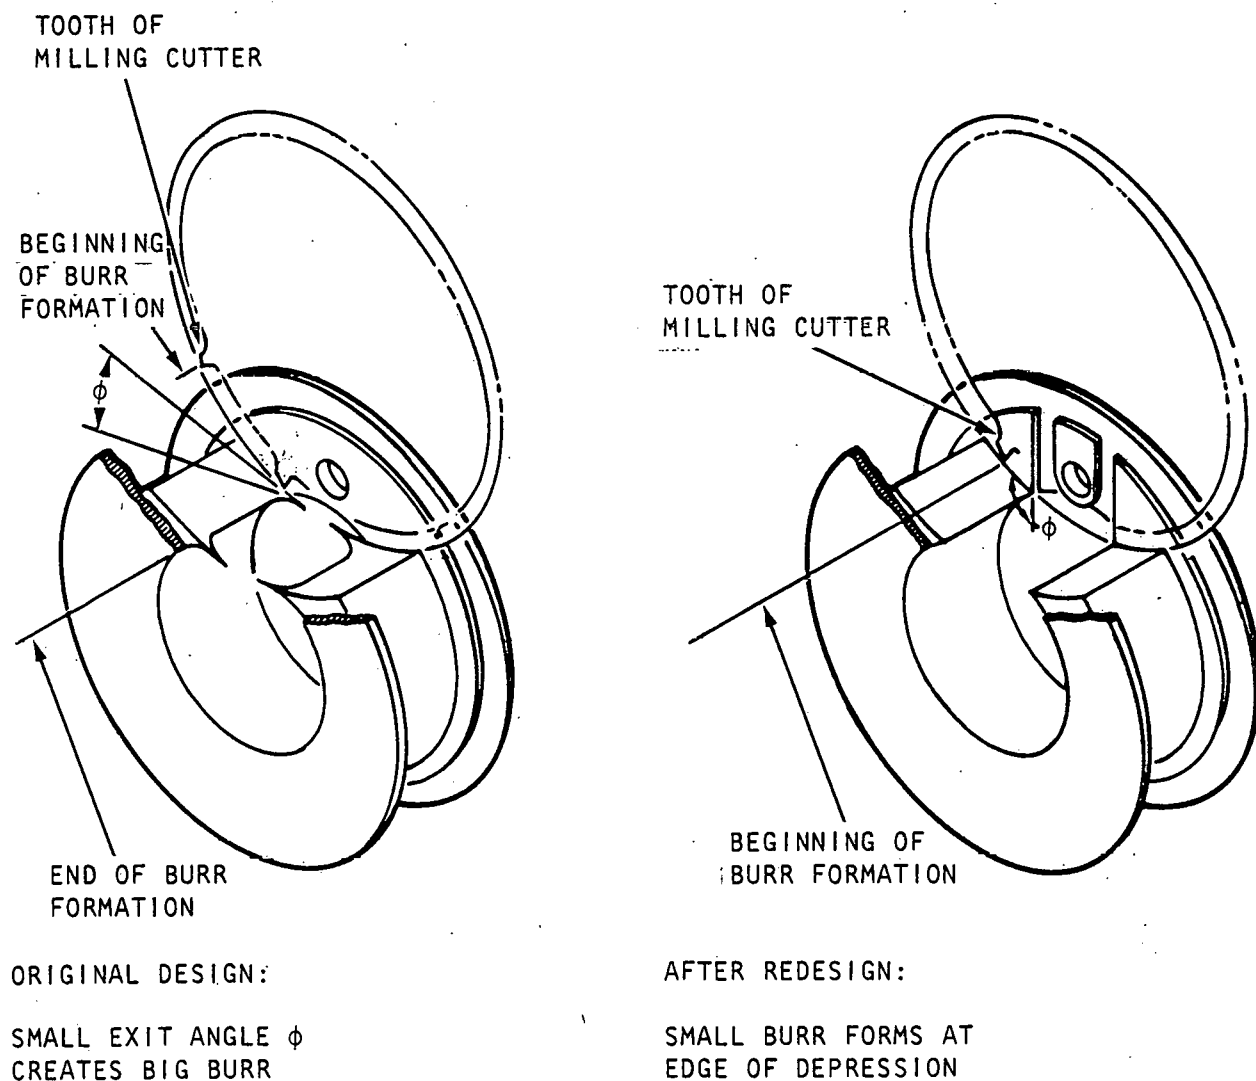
Change Geometry to Minimize Burr Size⁵⁷
